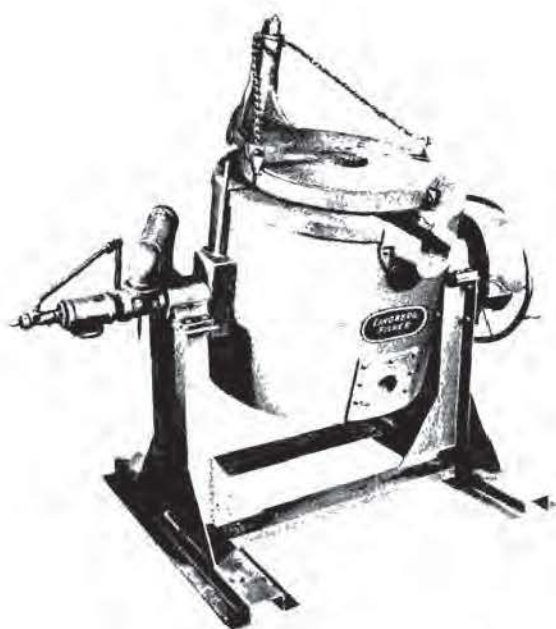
Tilting crucible furnace (Lindberg Engineering Co., Downey, Calif.).
